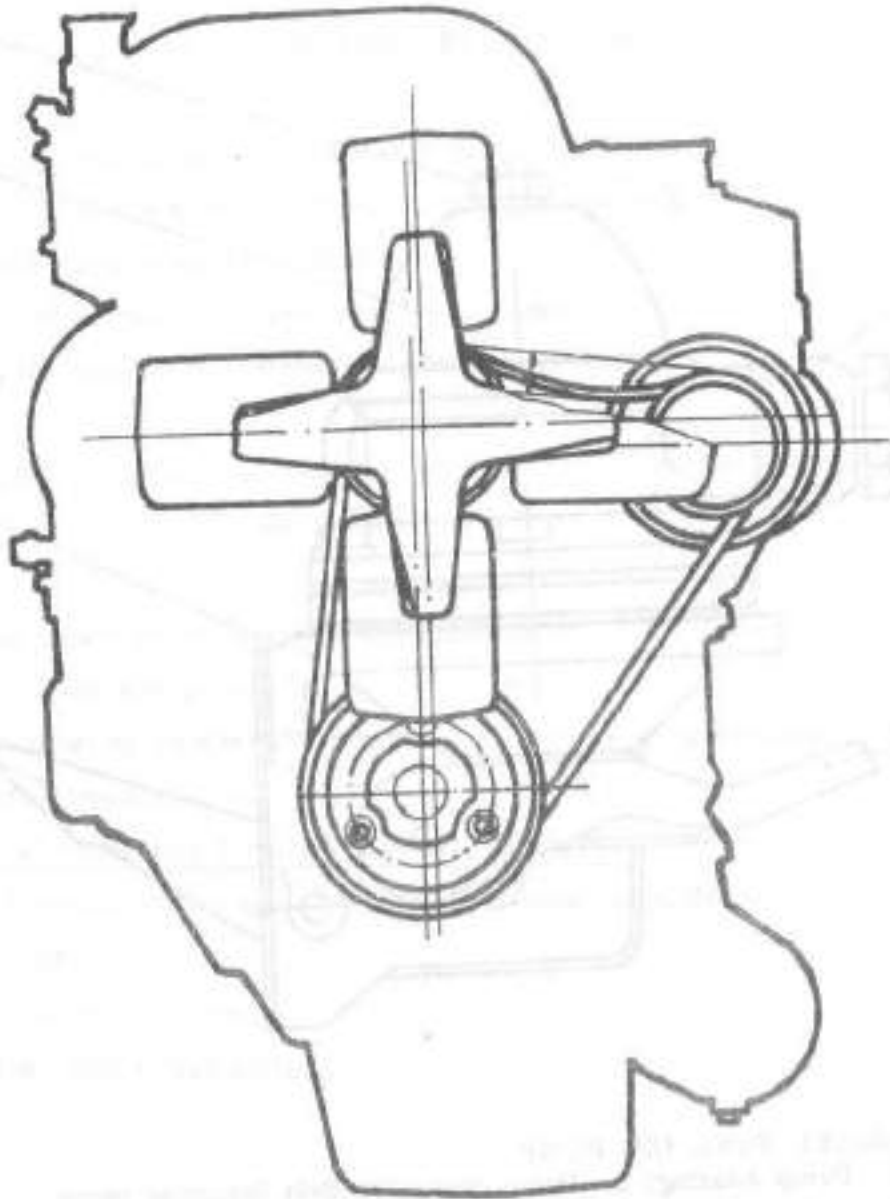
CHECKING ELEMENT FASTENING ON D-127 ENGINE
